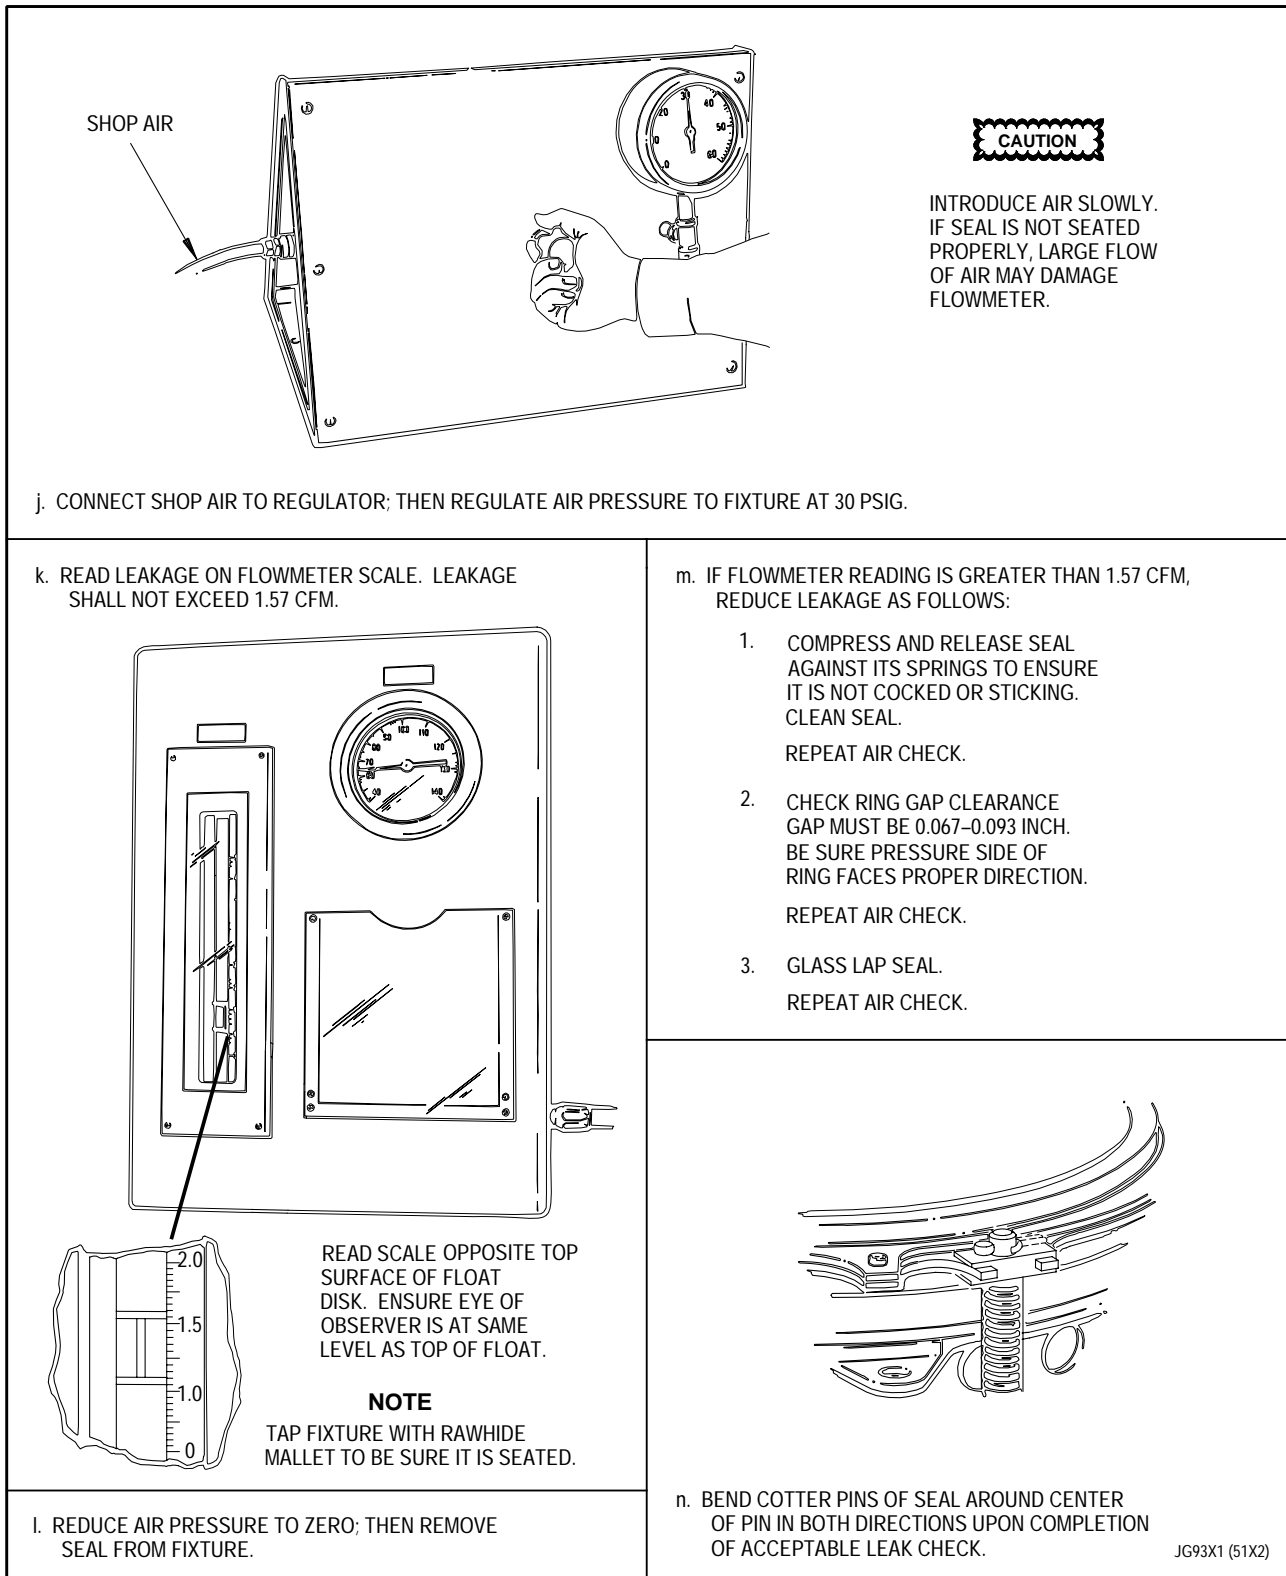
No. 2 and 3 Bearing Seal Assembly - Air Leak Check
